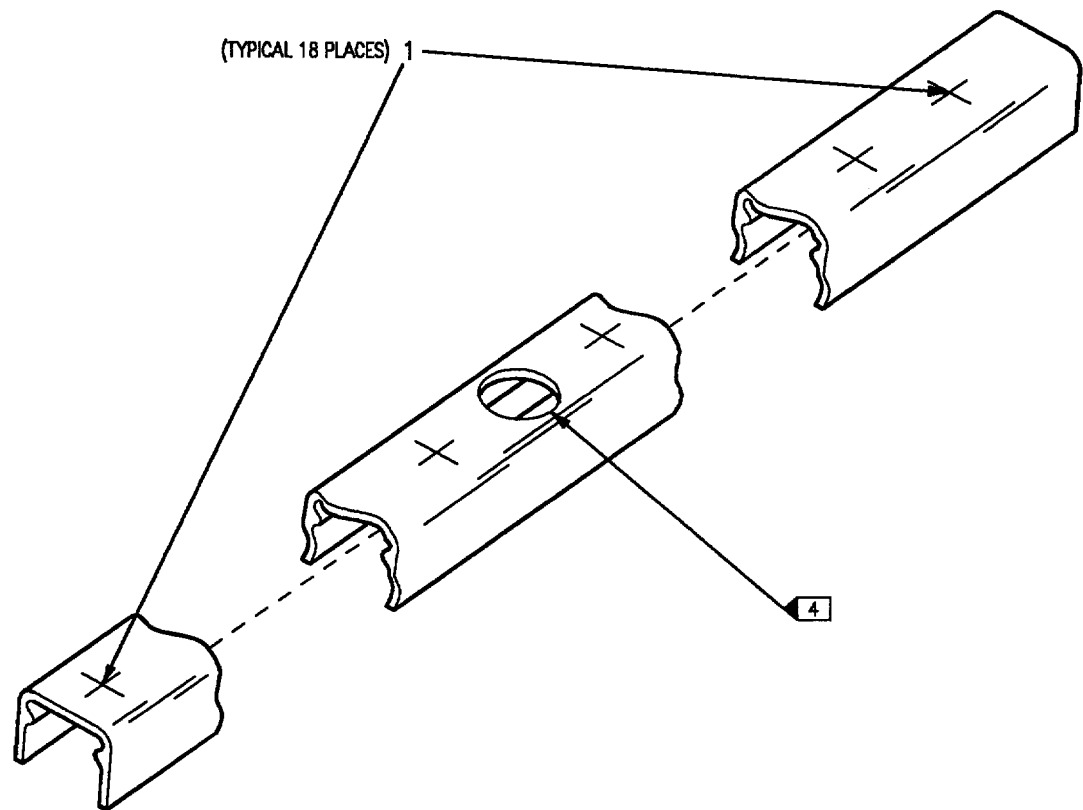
Inspection and Replacement - Aft Seal Retainer (Sheet 4)
